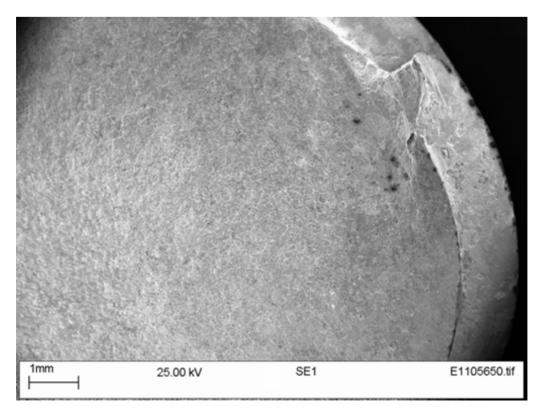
SEM fractograph, showing terminal fracture region of a fatigue cracked bolt.
